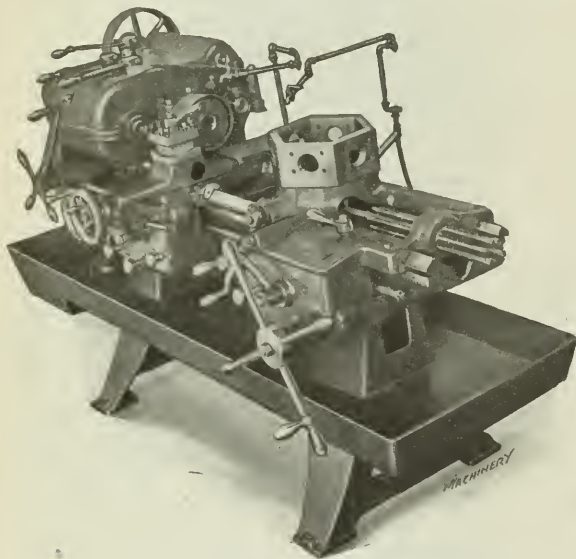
Foster Type I-B Universal Turret Lathe with Two Tool-carrying Units
